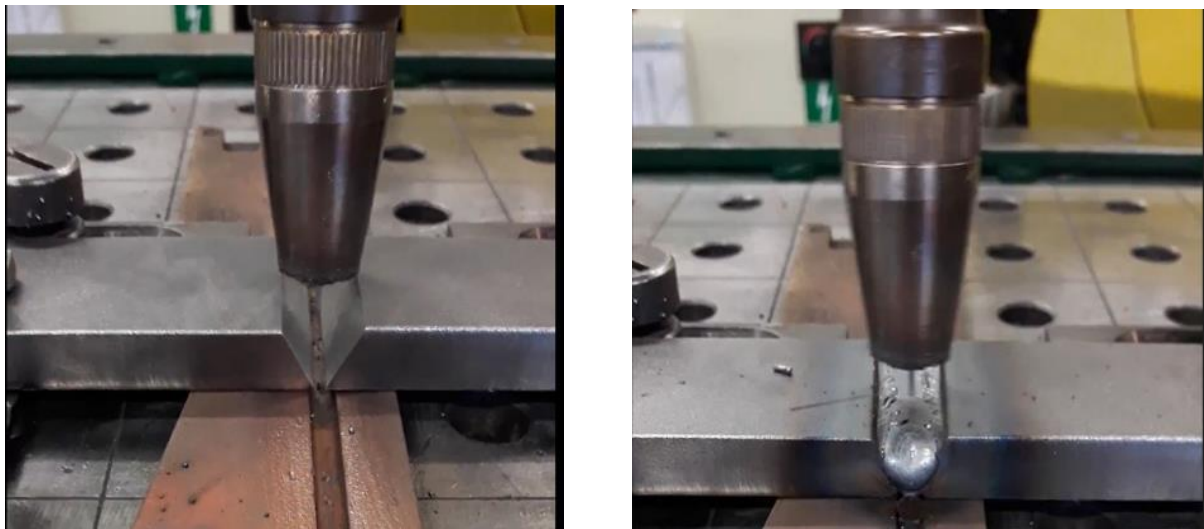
Welding process of Strenx 700 MC Plus steel plates with a sequence of the beads.
